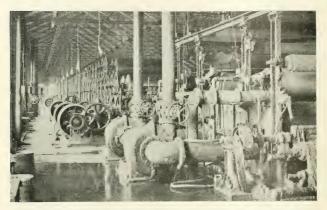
DRIVE SIDE OF A 120-INCH, TWO CYLINDER PAPER MACHINE
